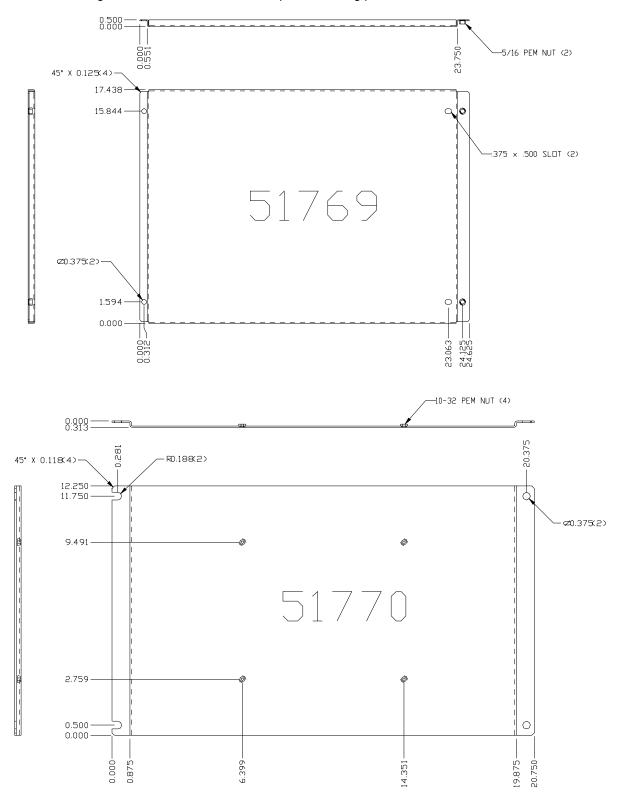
51769 and 51770 adapter mounting plate dimensions.
